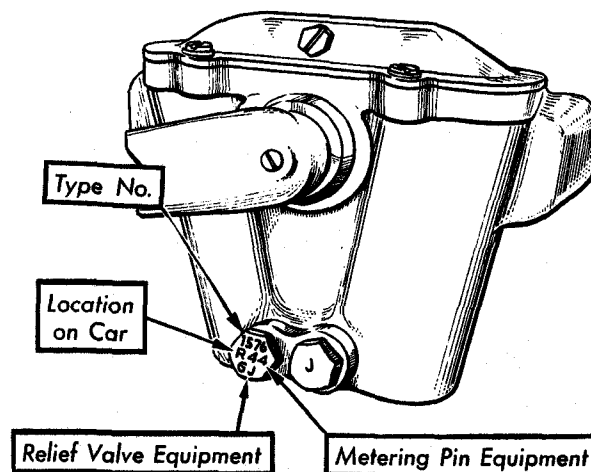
These markings indicate the metering pin and relief valve equipment when the car was shipped.
